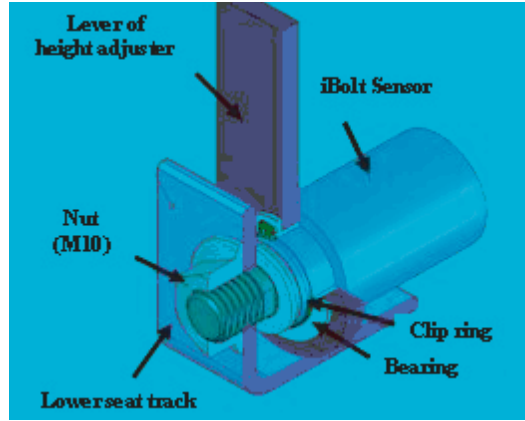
CAD schematic of the BOSCH iBolt™ integration in a seat structure.
